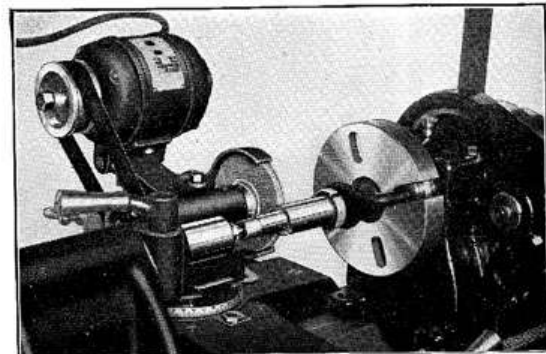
Finishing the Outside Diameter of a Hardened Steel Bushing by Grinding.
